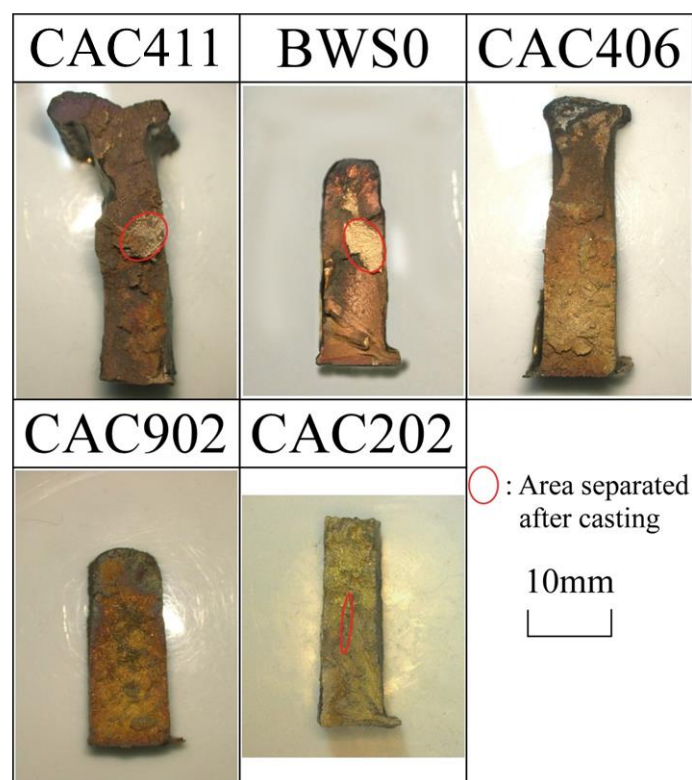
Appearances of the fracture surfaces of various Cu alloy castings in the permanent mold with 200mm of the distance between flanges.
